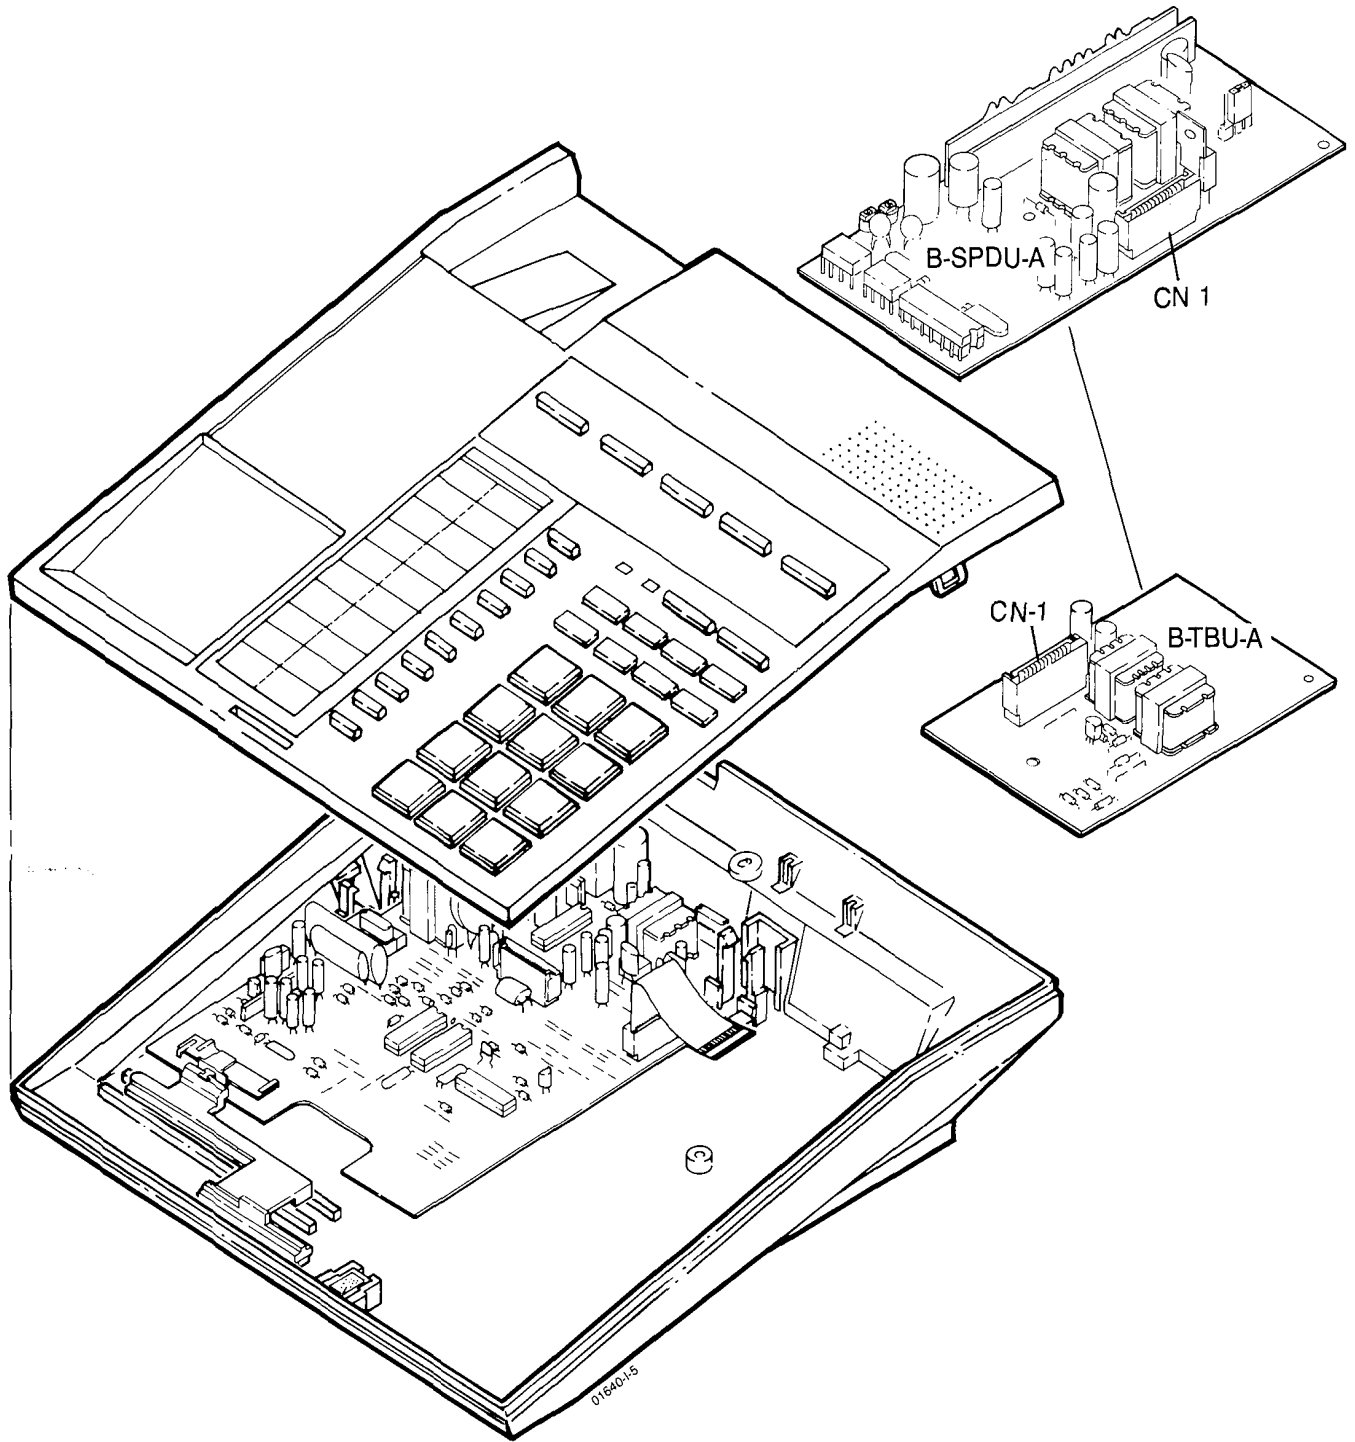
INSTALLATION OF SPEAKERPHONE PCB
